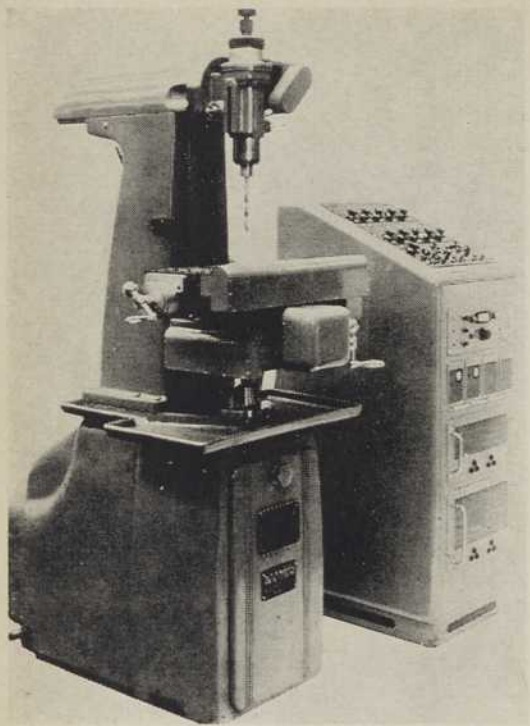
AUTOMATIC SETTING COORDINATE DRILLING MACHINE USING FERRANTI ELECTRONIC SYSTEM.
